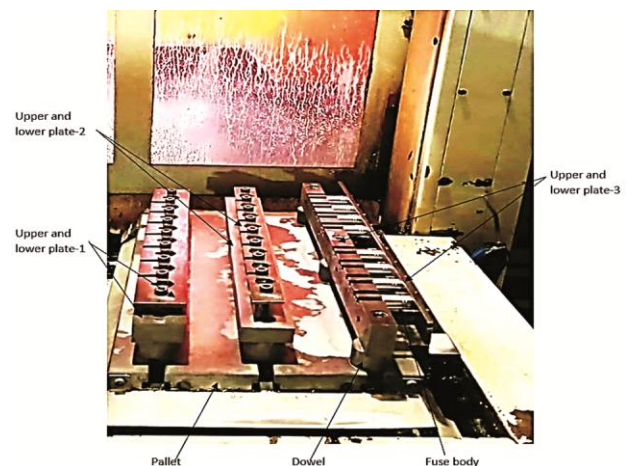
Manufactured Type-B fixture holding 24 fuse bodies
